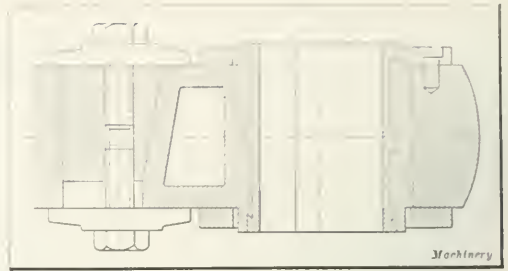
Design of Special Boring-bar for machining Piece shown in Fig. 3
